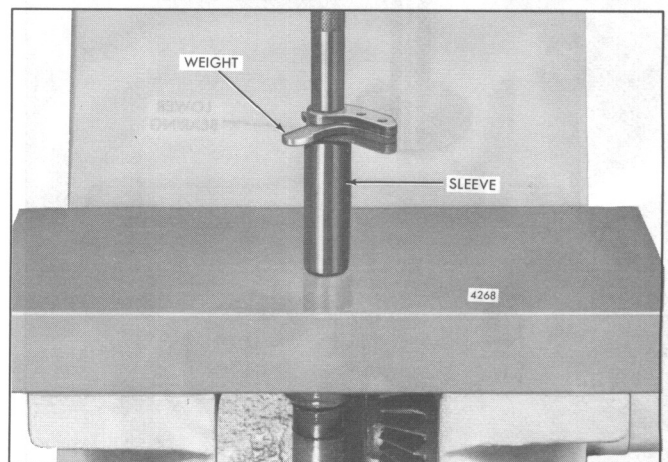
Removing Governor Weight Bearings using Tool J 8985
